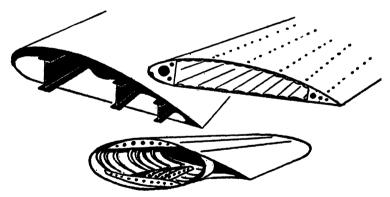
Left: Multispar wing; Right: Shell wing; Below: Monocoque wing
